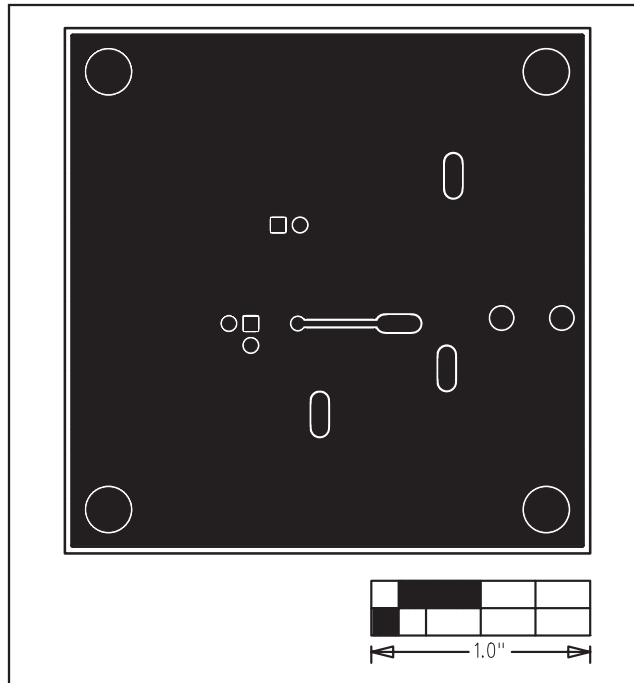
MAX9716 EV Kit PC Board Layout—Solder Side
